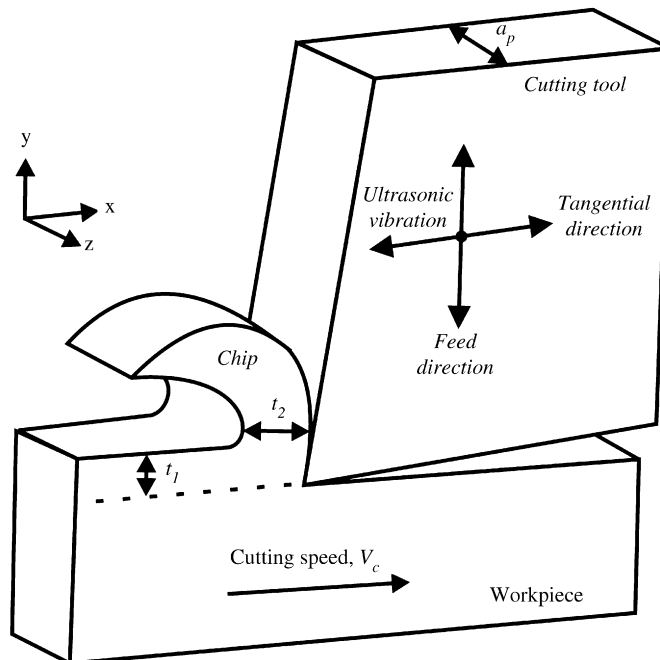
A scheme of the relative movement of the workpiece and cutting tool in 3D simulations of UAT.
